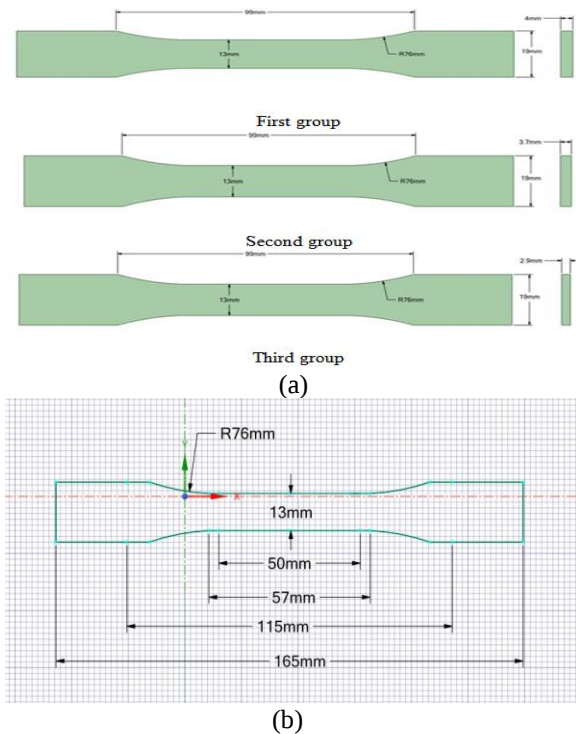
(a) Dimensions of tensile specimen for first, second, and third groups. All dimensions are in millimeters (mm) (b) Detailed drawing of tensile specimen with key dimensions in mm
